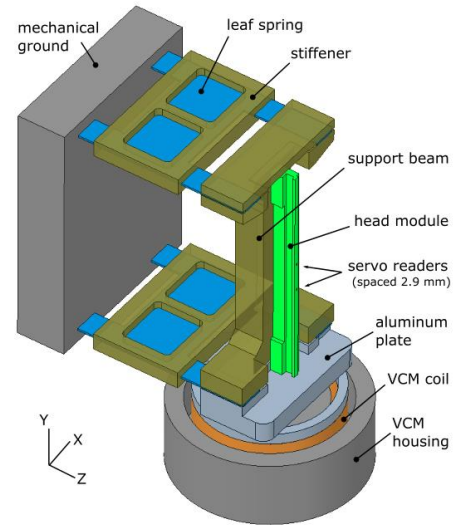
Schematic view of the head actuator assembly. Not shown are a flex cable connected to the head module which carries signals from the data and servo readers, and a dashpot damping unit located within the VCM, which limits the Q factor of the fundamental resonance.
